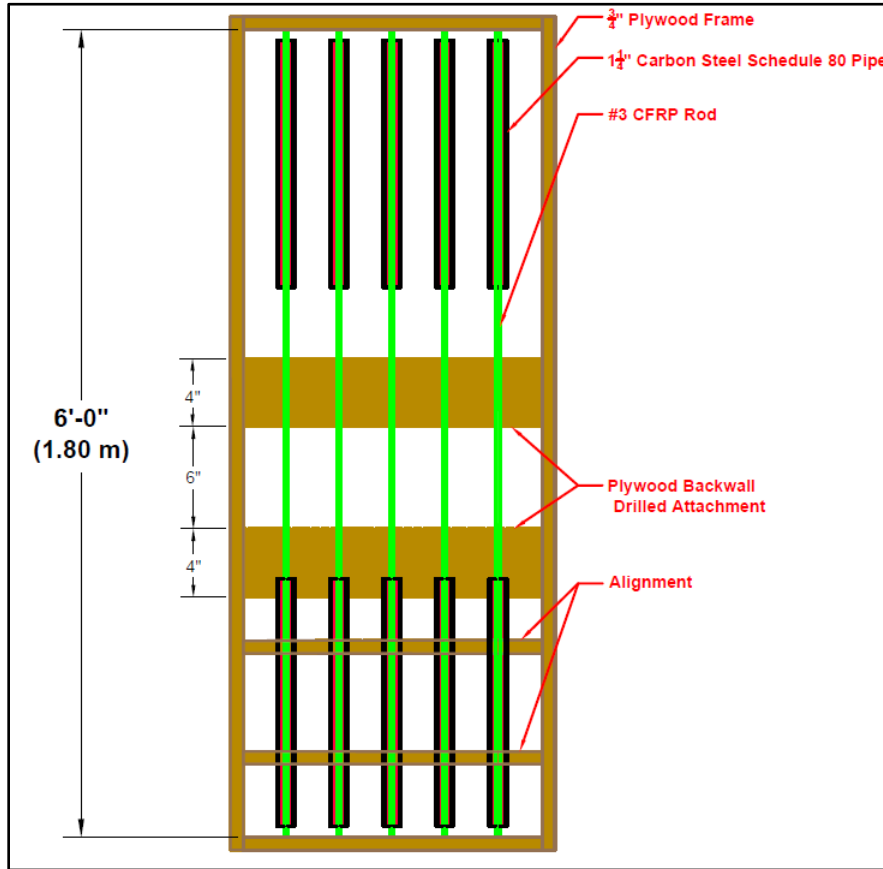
Jig for Aligning ASTM Specimens and Anchors
